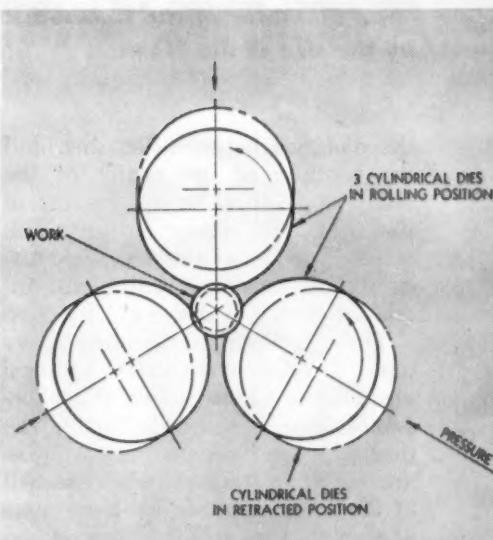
Three cylindrical-die machines have three dies equally spaced around the blank which floats between them, as shown in this drawing. The dies are mounted on parallel axes and rotate in the same direction.
